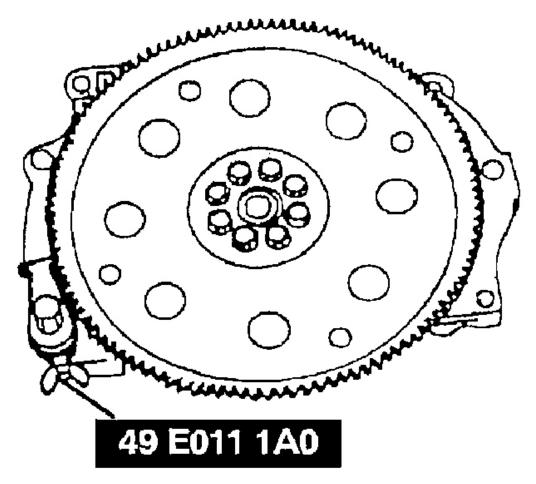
Installing Crankshaft Pulley Courtesy of MAZDA MOTORS CORP.
